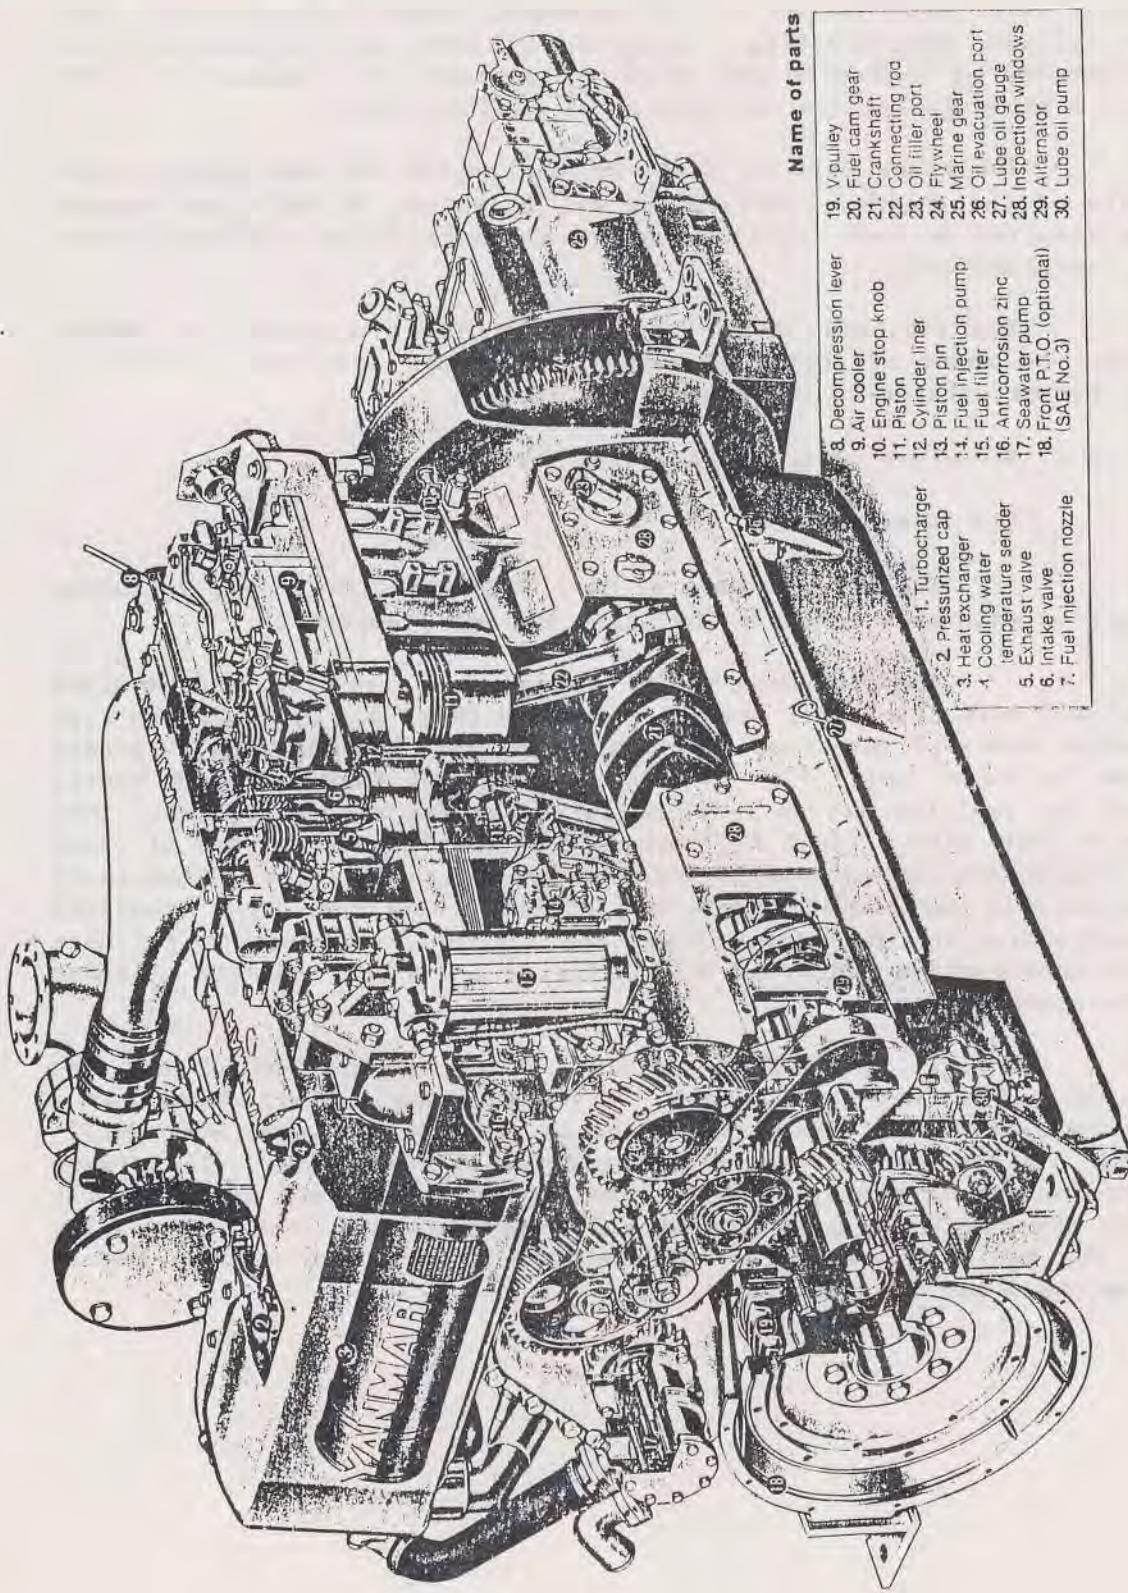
Lightweight High-speed Type Marine Diesel Engine
